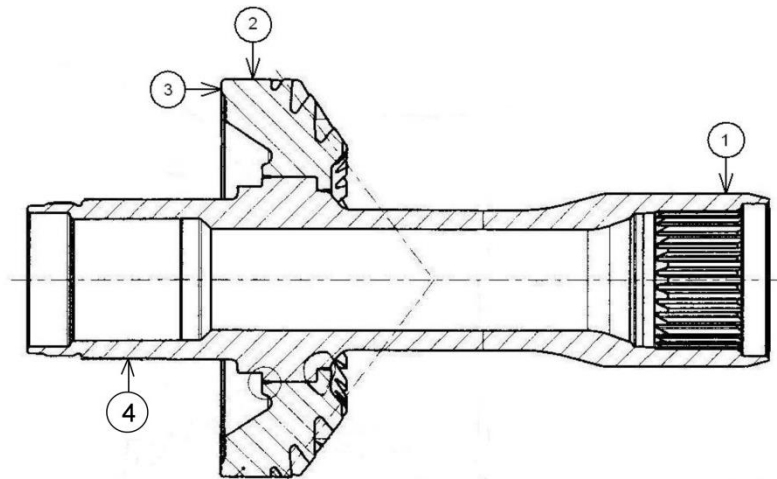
Weld part with marked points of run-/out measurement
